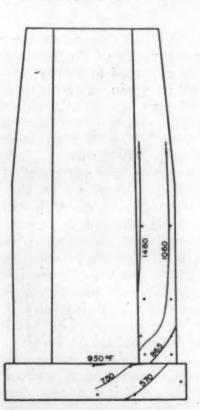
Isotherms in Cast-Iron Mold and Stool after 60 min. Duration of Test.
